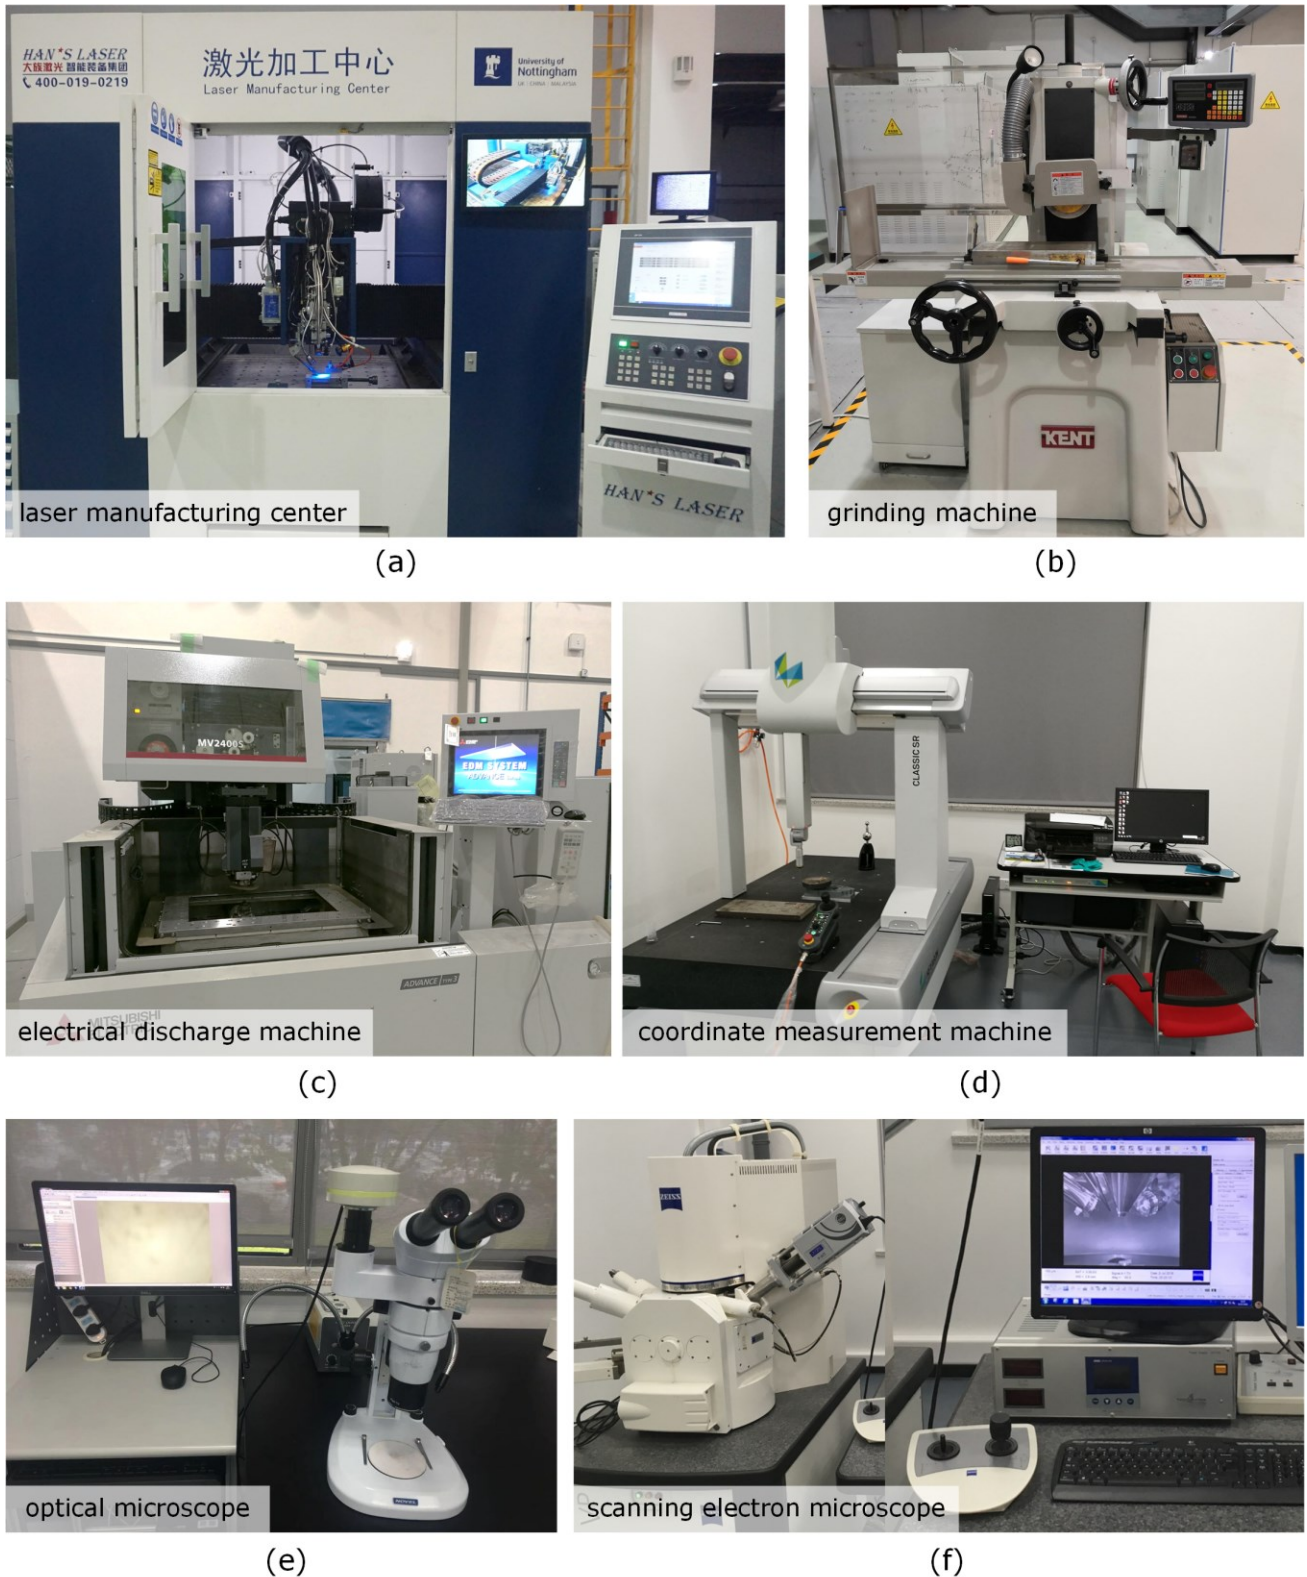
Facilities used in experiment: (a) laser manufacturing centre, (b) grinding machine, (c) electrical discharge machine, (d) coordinate measurement machine, (e) optical microscope, and (f) scanning electron microscope.
